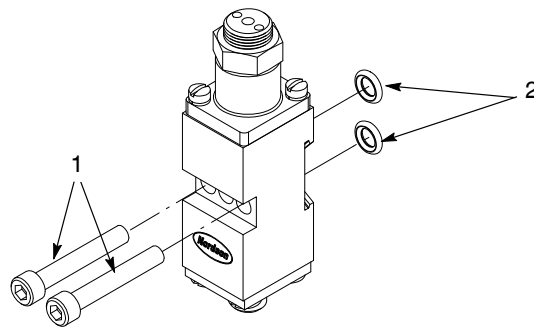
Replacing a module (standard ClassicBlue module shown)
